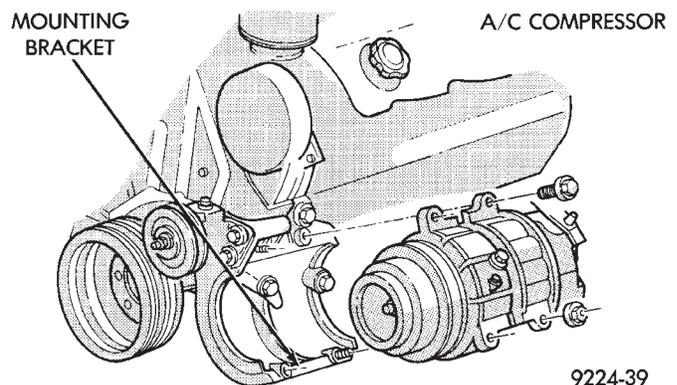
A/C Compressor Removal and Installation—3.0 L Engine
